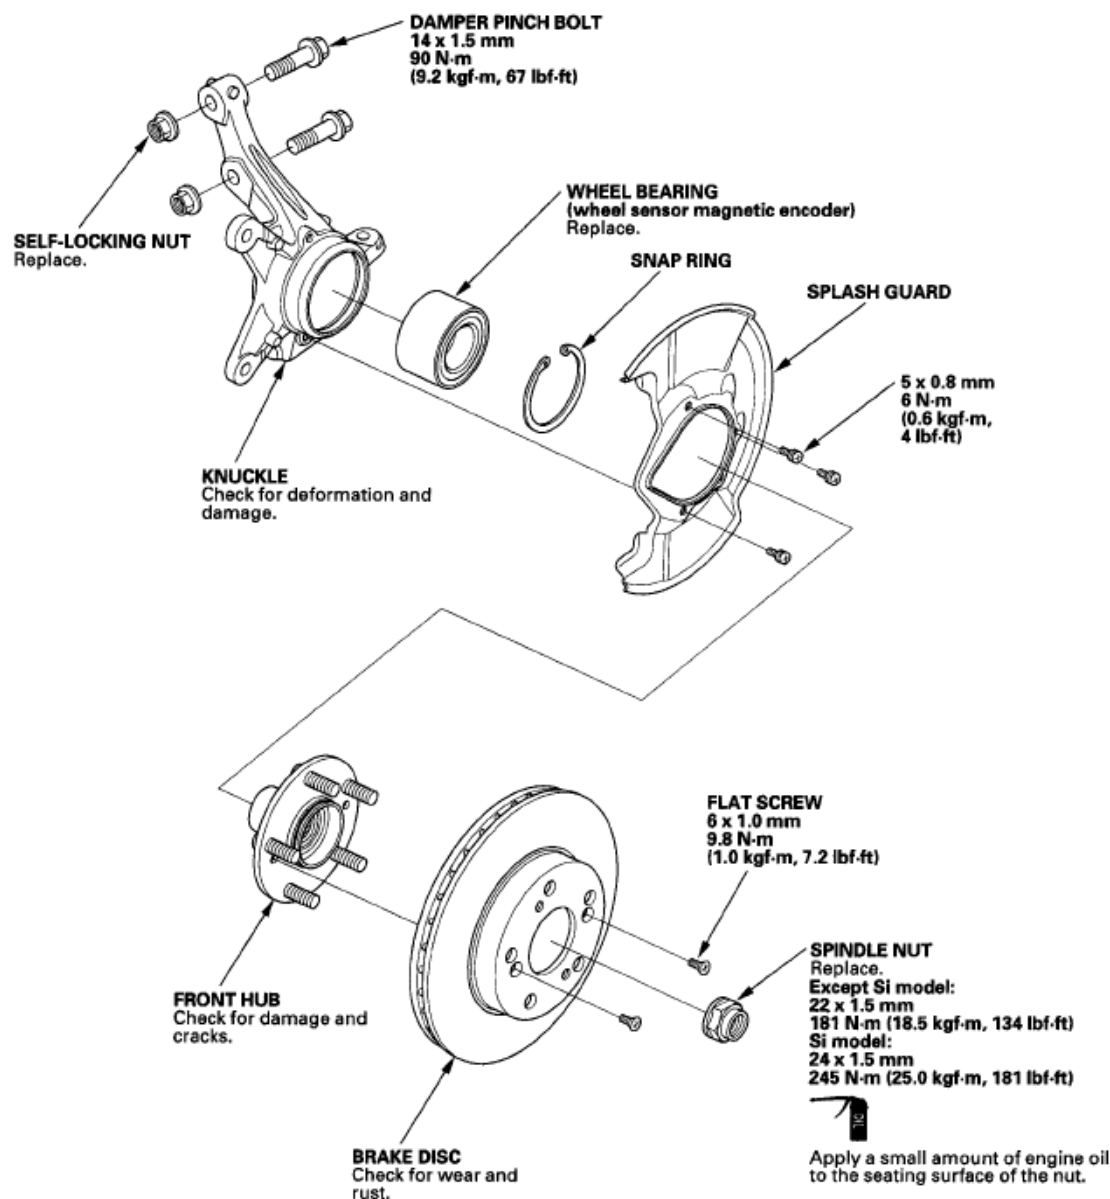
Exploded View Of Knuckle/Hub/Wheel Bearing (With Torque Specifications)
